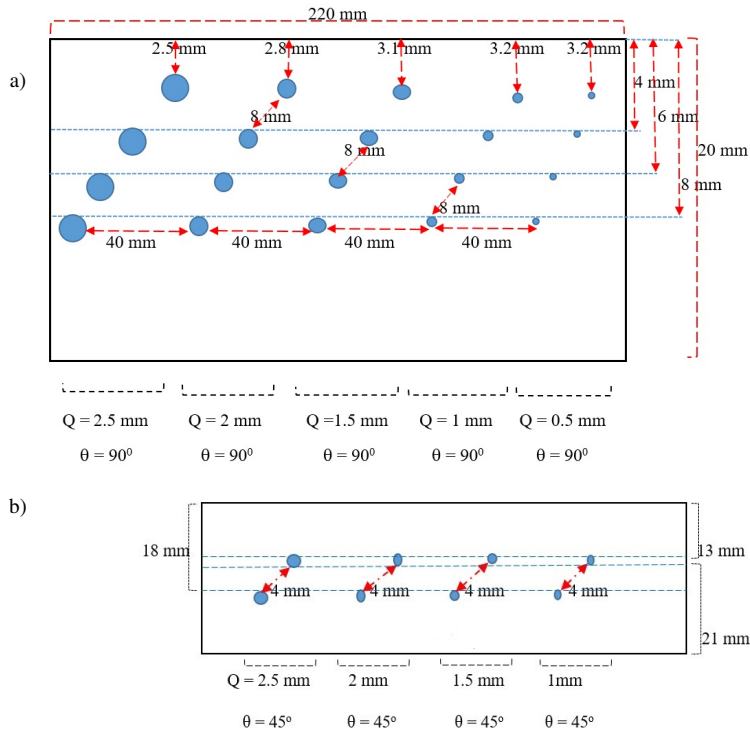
Design of a) steel block front and b) aluminum block front (Note that Q is FBH diameter, θ is FBH angle and the surfaces of blocks are smooth).
